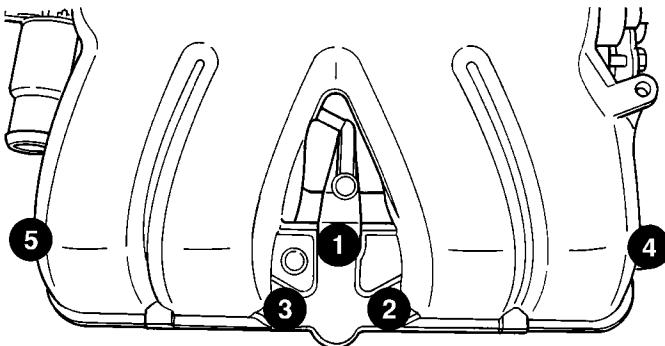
Upper Intake Manifold Tightening Sequence - 2.4L
